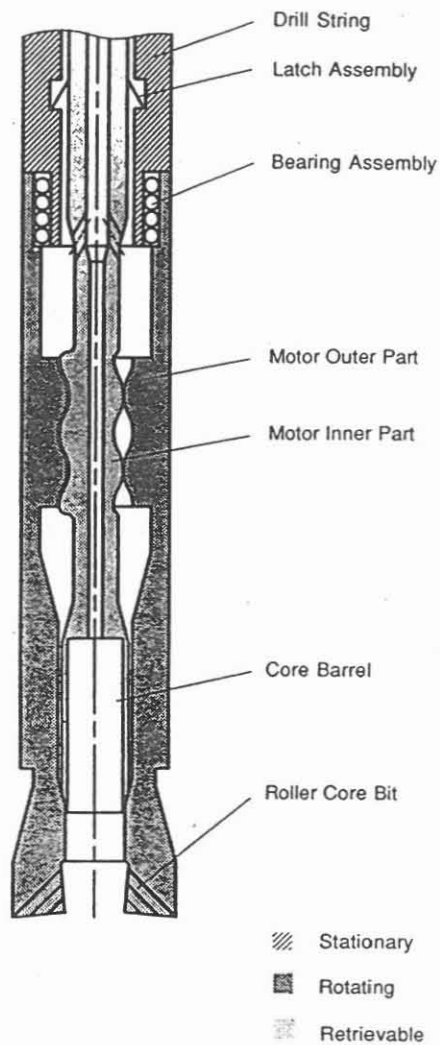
Motor coring system with retrievable inner barrel and motor shaft
